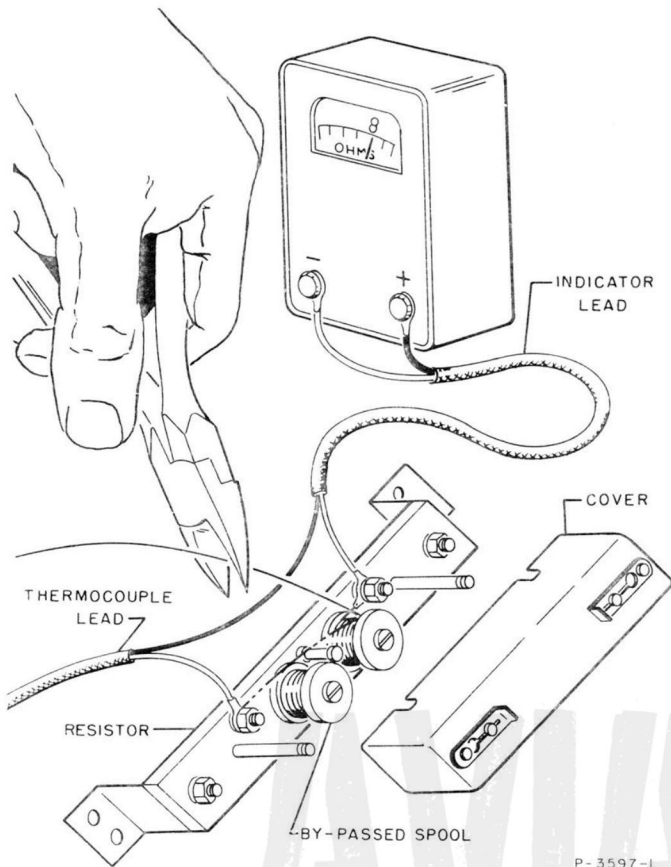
Engine Cylinder-Head Temperature Indicator Thermocouple Resistor Adjustment
